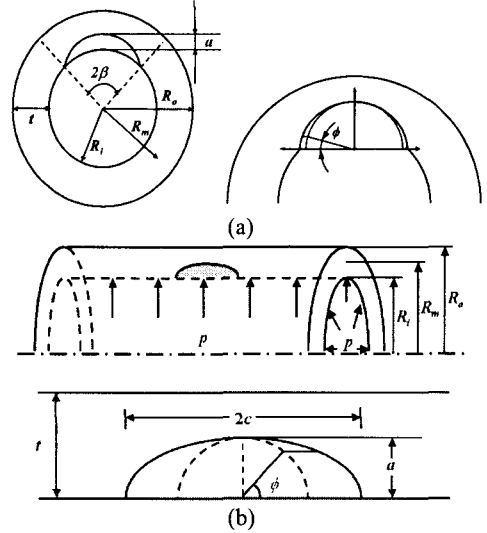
Geometries and dimensions for (a) a cylinder with a part circumferential inner surface crack, and (b) a cylinder with an axial inner surface crack
